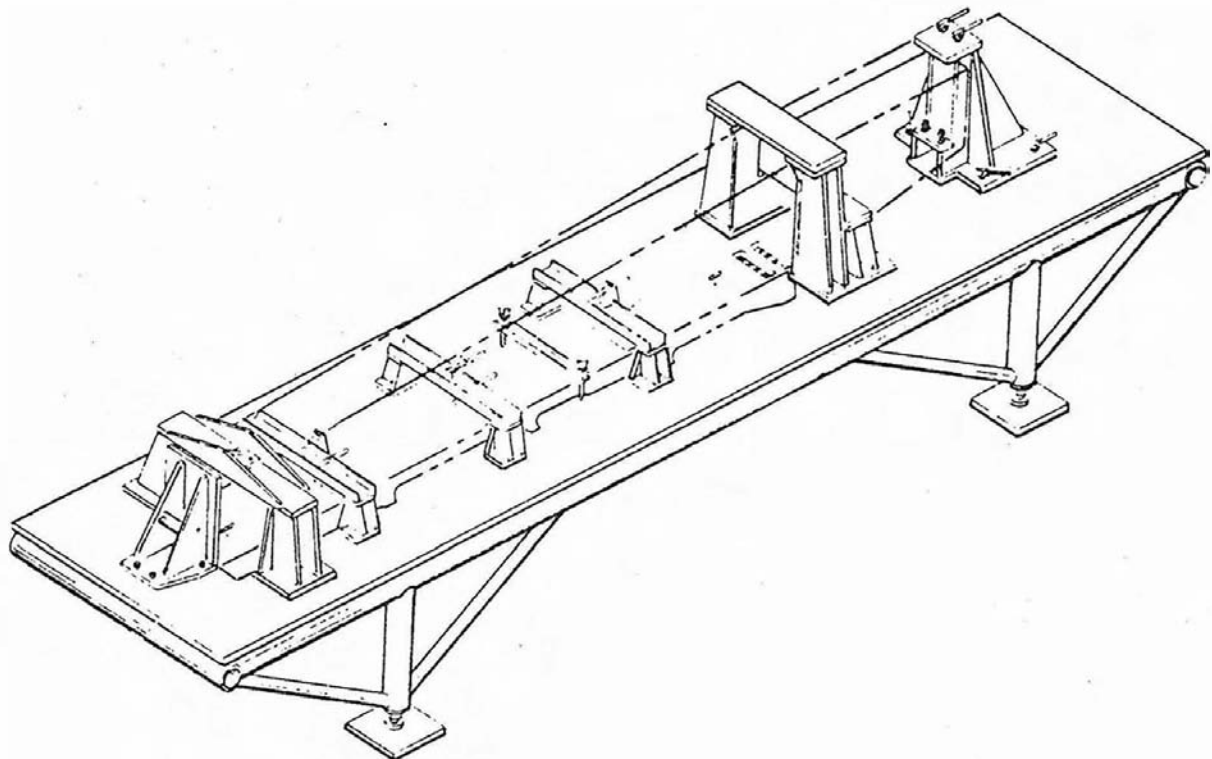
Outboard Thrust Post Assembly, Assembly Fixture
